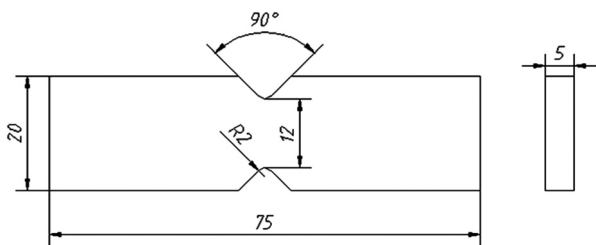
The configuration of the shear test specimen (dimensions in millimeters).
